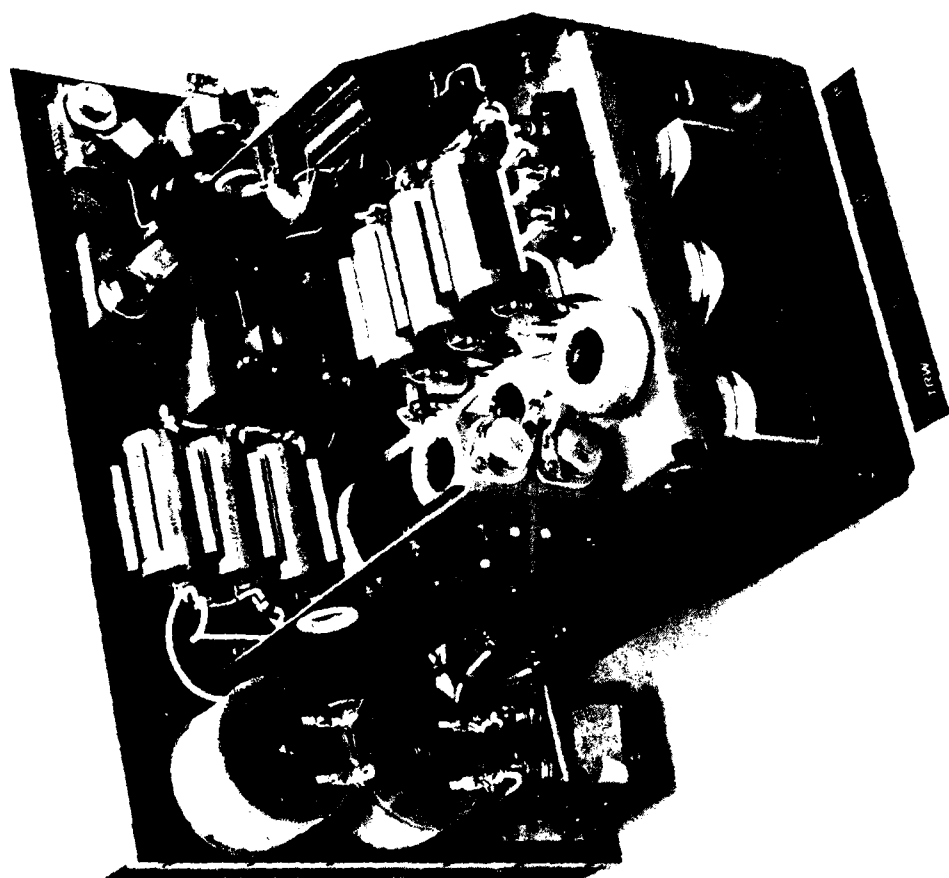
A4-REAR PANEL (LEFT SIDE VIEW)
